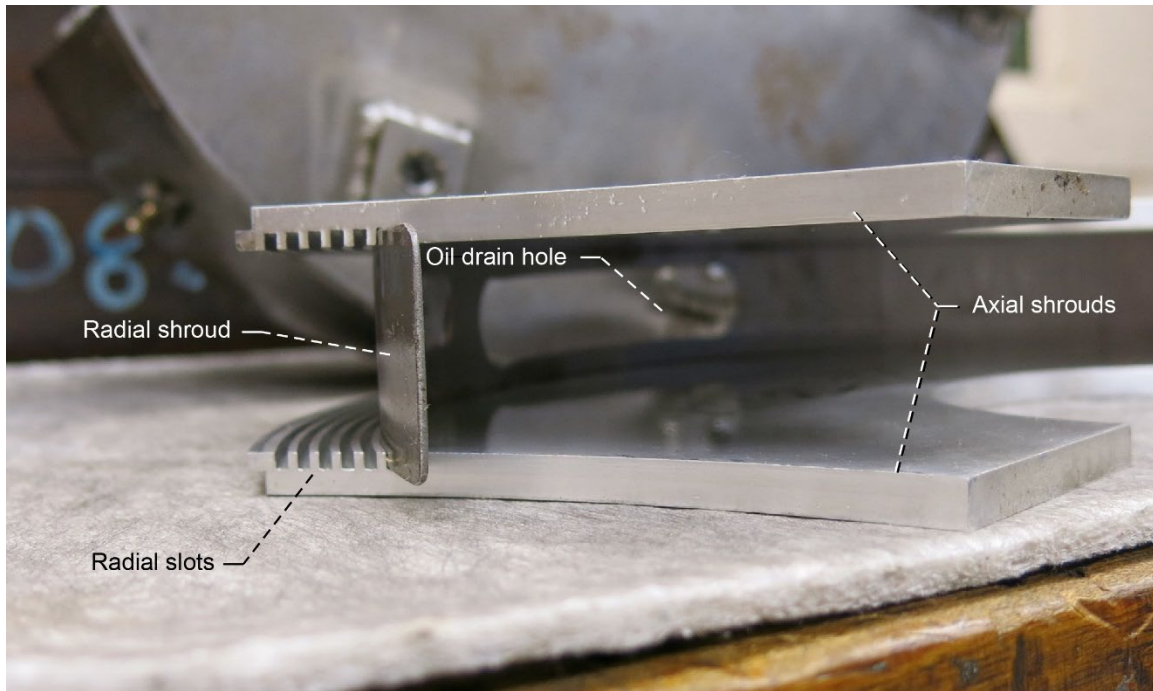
Closeup of 0.04-in. (1.00-mm) axial and radial clearance shrouding.
